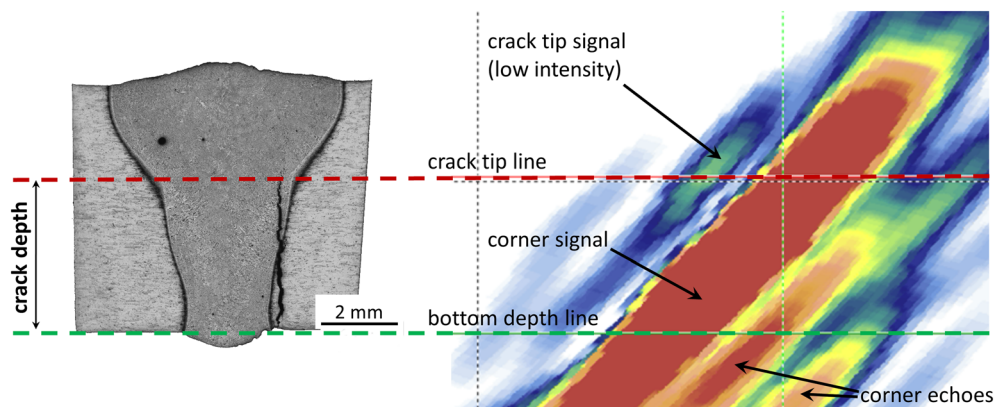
Schematic representation of ultrasonic-phased array technique for the measurement of the fatigue crack depth [Colour figure can be viewed at [wileyonlinelibrary.com](http://wileyonlinelibrary.com)]
